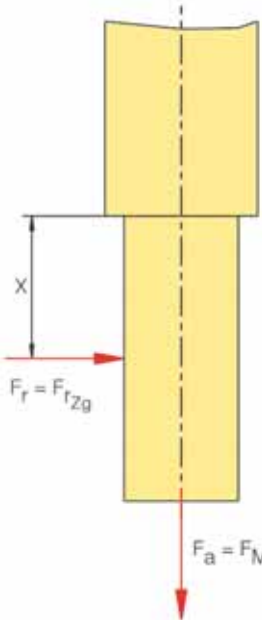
Mechanical drive for a vertical shaft (spur gears)
